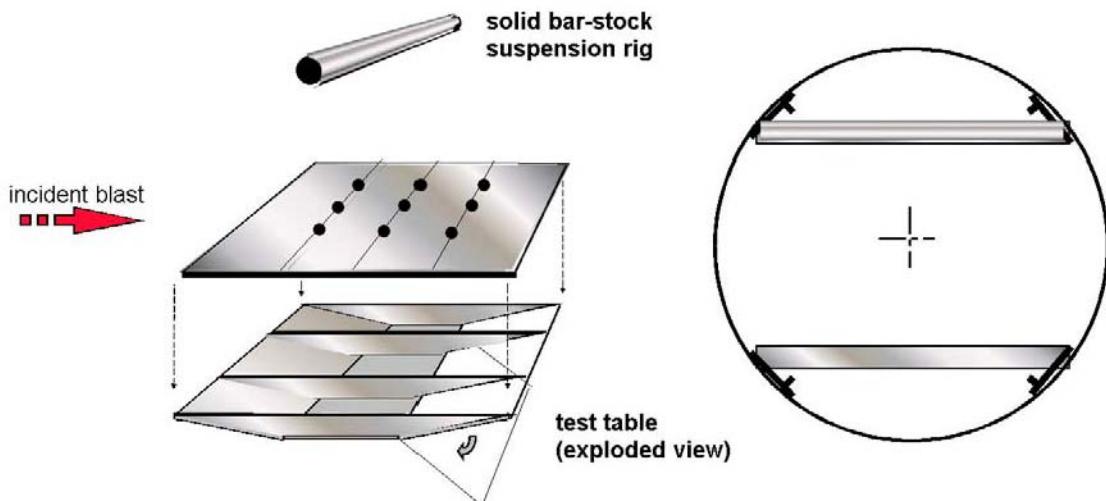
Design sketch for a heavy-plate relocatable test table or suspension bar capable of securing diffraction targets through a range of test stations along the Tube length, including close to the fireball conditions of the driver. Flanges along the side of the table allow securing these target mounting stations by bolts to rails welded along the internal sides of the Tube.
